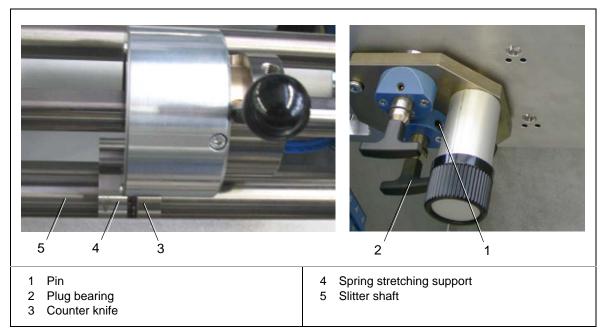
Change the counter knives of the longitudinal cutting unit.
